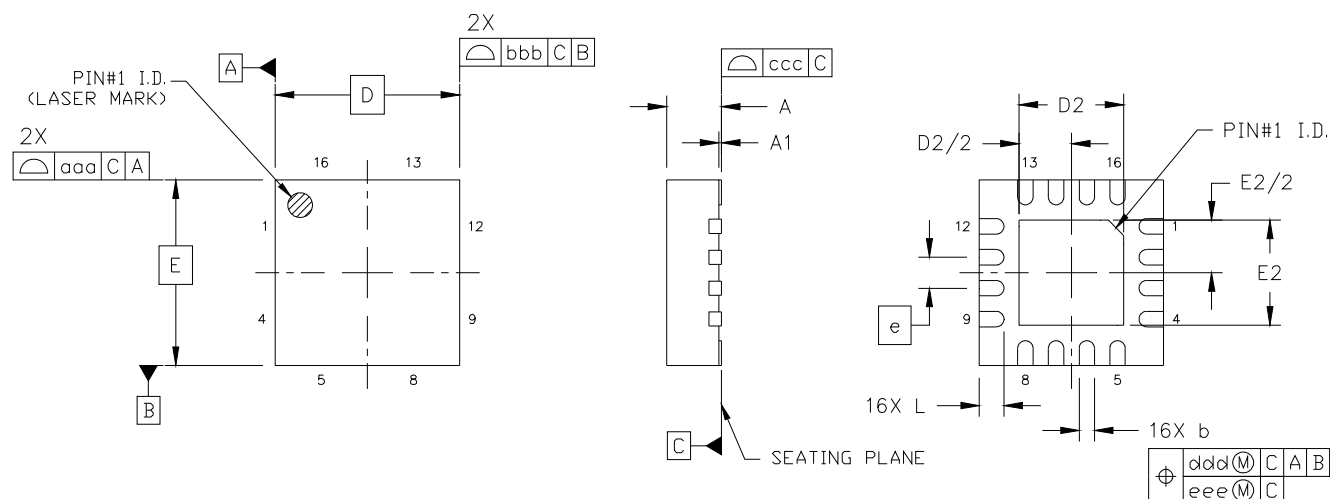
Si53306 3x3 mm 16-QFN Package Diagram
